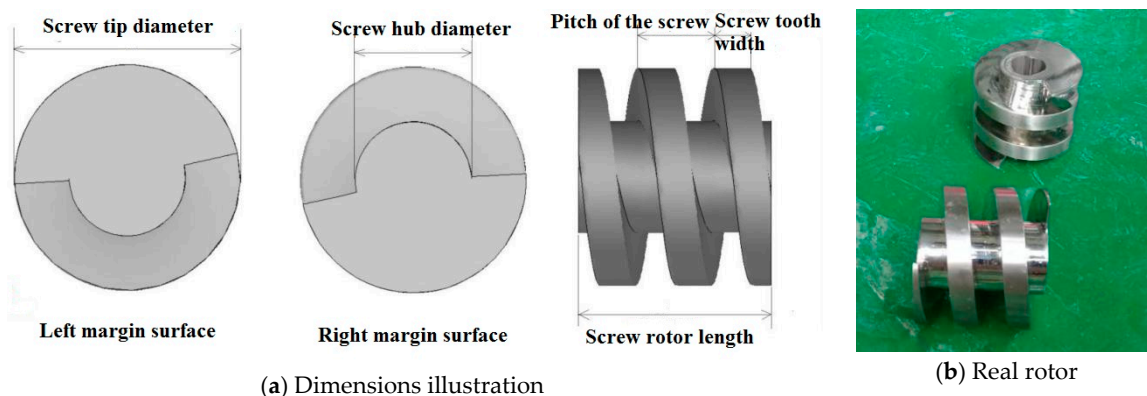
Screw pump rotor main parameters and the view of both screws (right side photography). See also Table 1.
